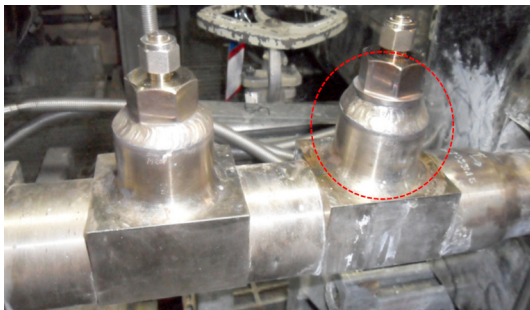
Configuration of post-welded adaptor - boss assembly
